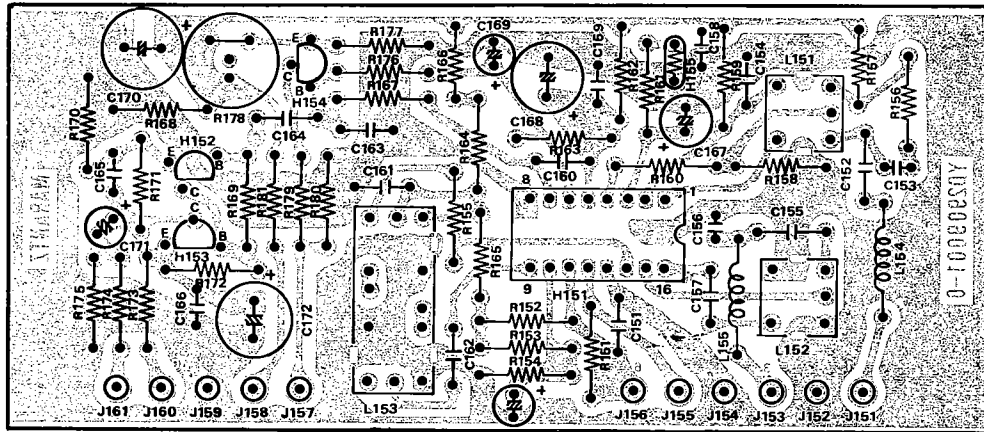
AM Tuner Unit Assembly P150 Component Locations
